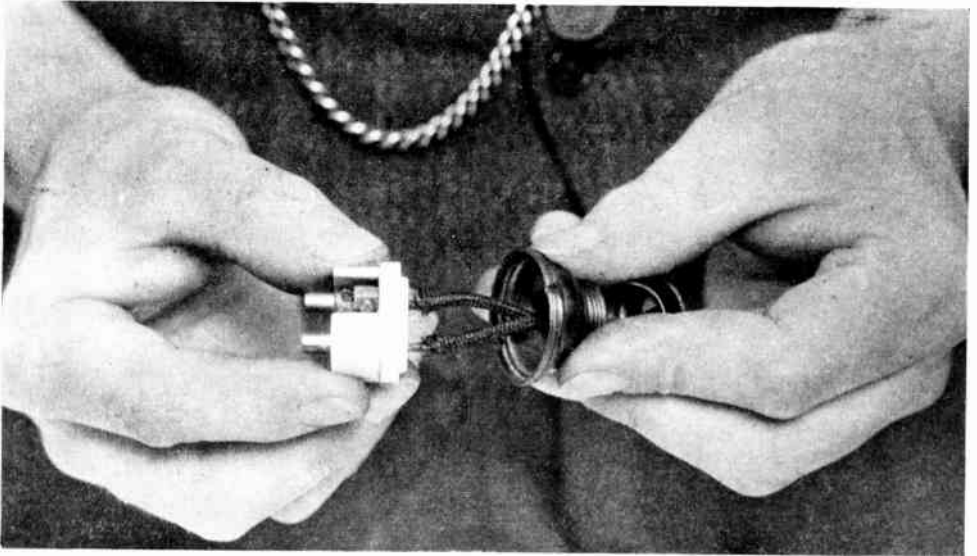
HOW TO ASSEMBLE A LAMPHOLDER.
